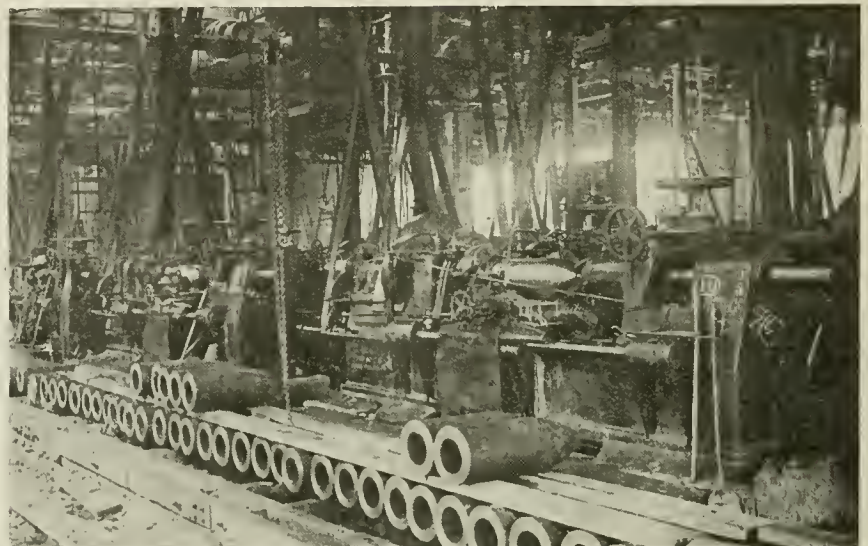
ROUGH TURNING SHELL BODIES—"A.M.C." LATHES.
